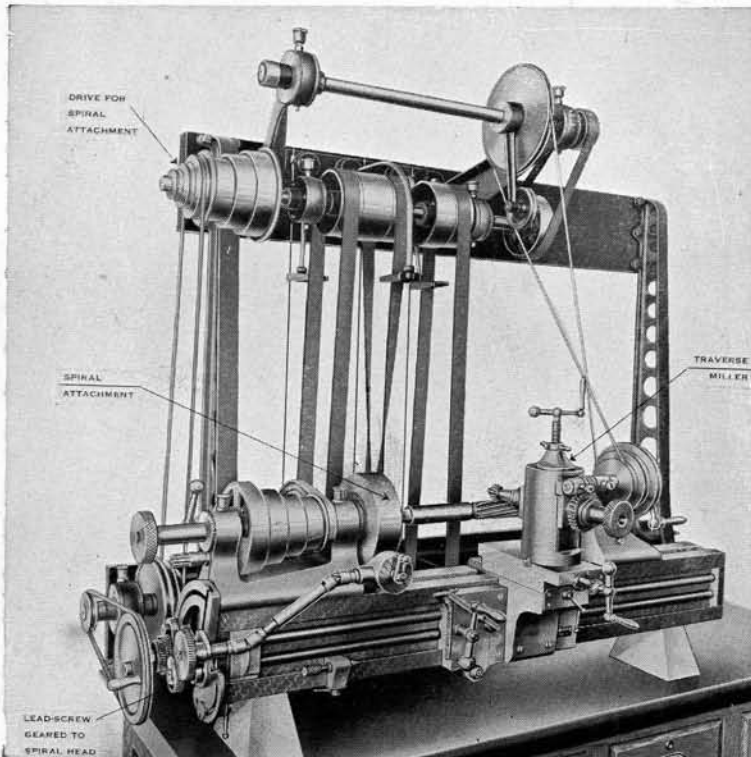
Rivett 608 (4 N.S.) lathe on cabinet with Traverse Miller and Spiral Attachment fluting a hand reamer
